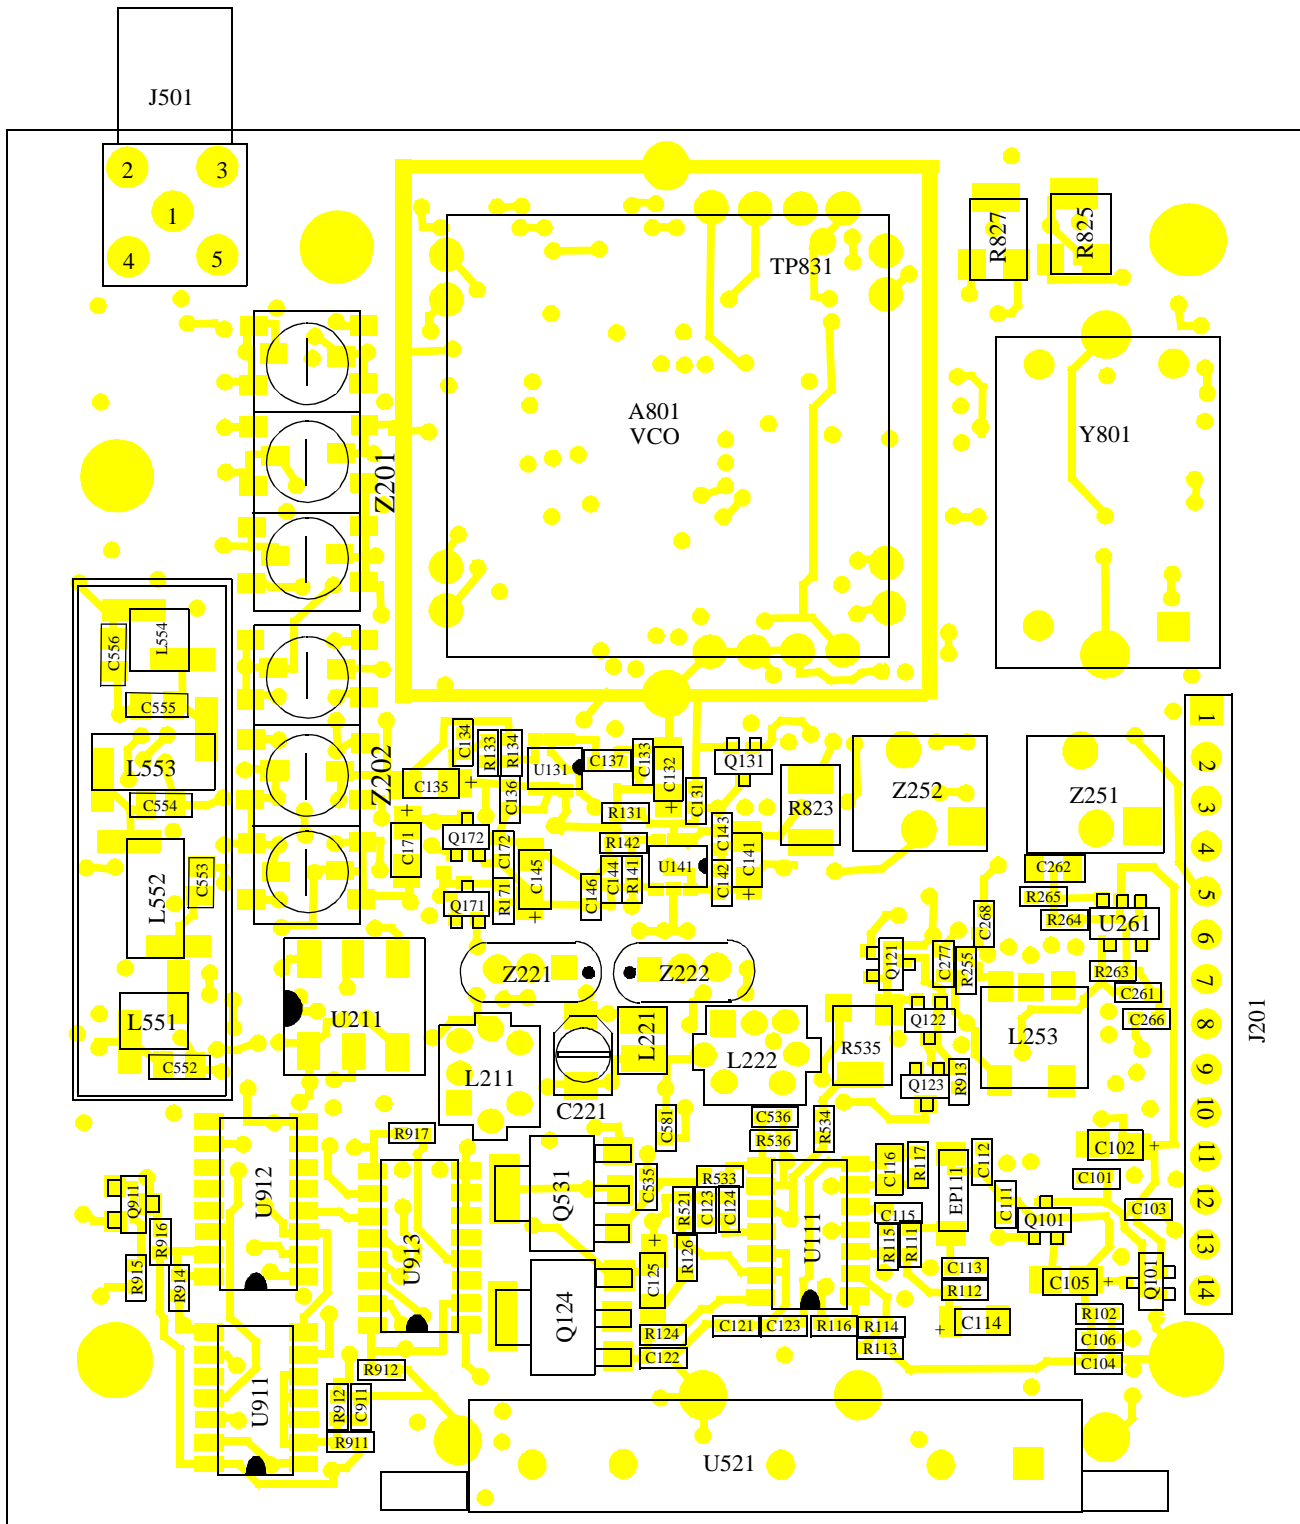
TRANSCEIVER COMPONENT LAYOUT (COMPONENT SIDE VIEW)
